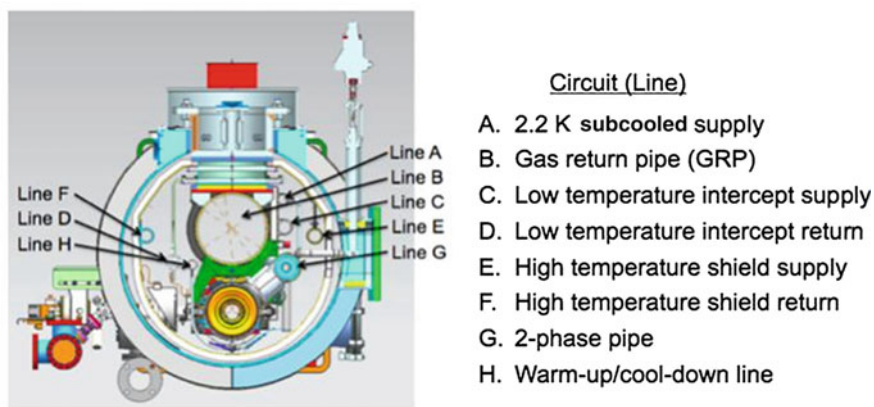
LCLS-II cryomodule assembly cross-section
